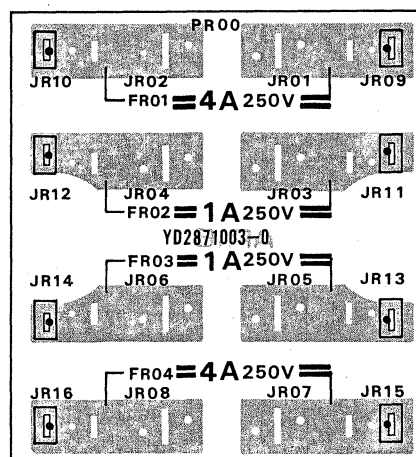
Fuse Board - PR01 Component Assembly Diagram
